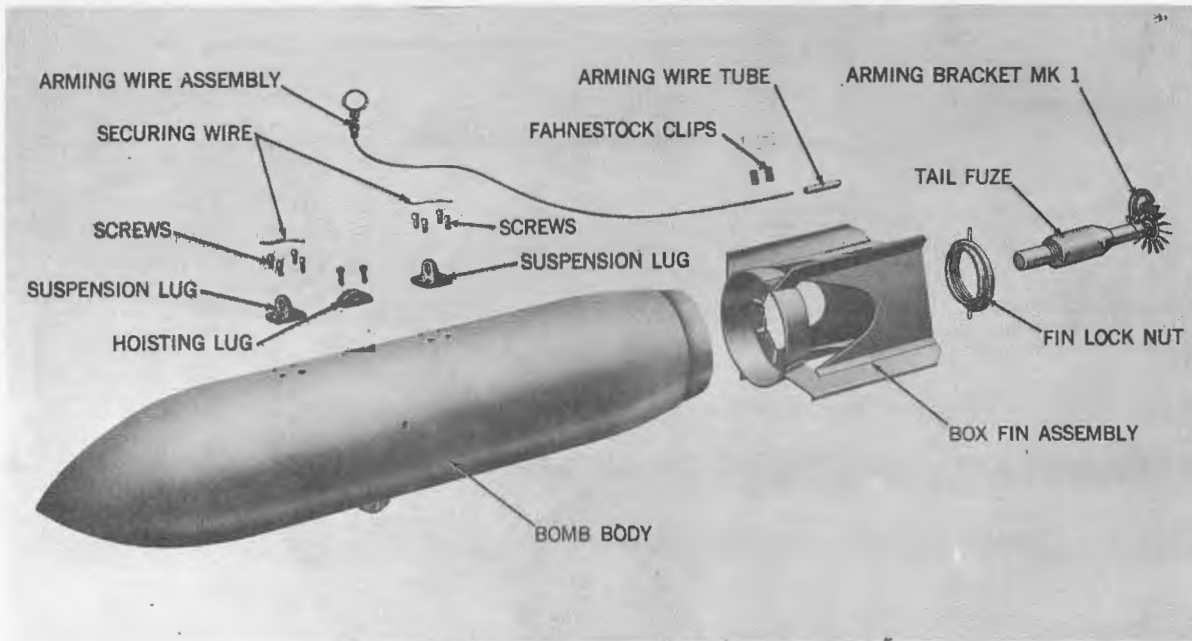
1000-lb AP Bomb AN-Mk 33 Mods 1, 2, & 3, Exploded View.
